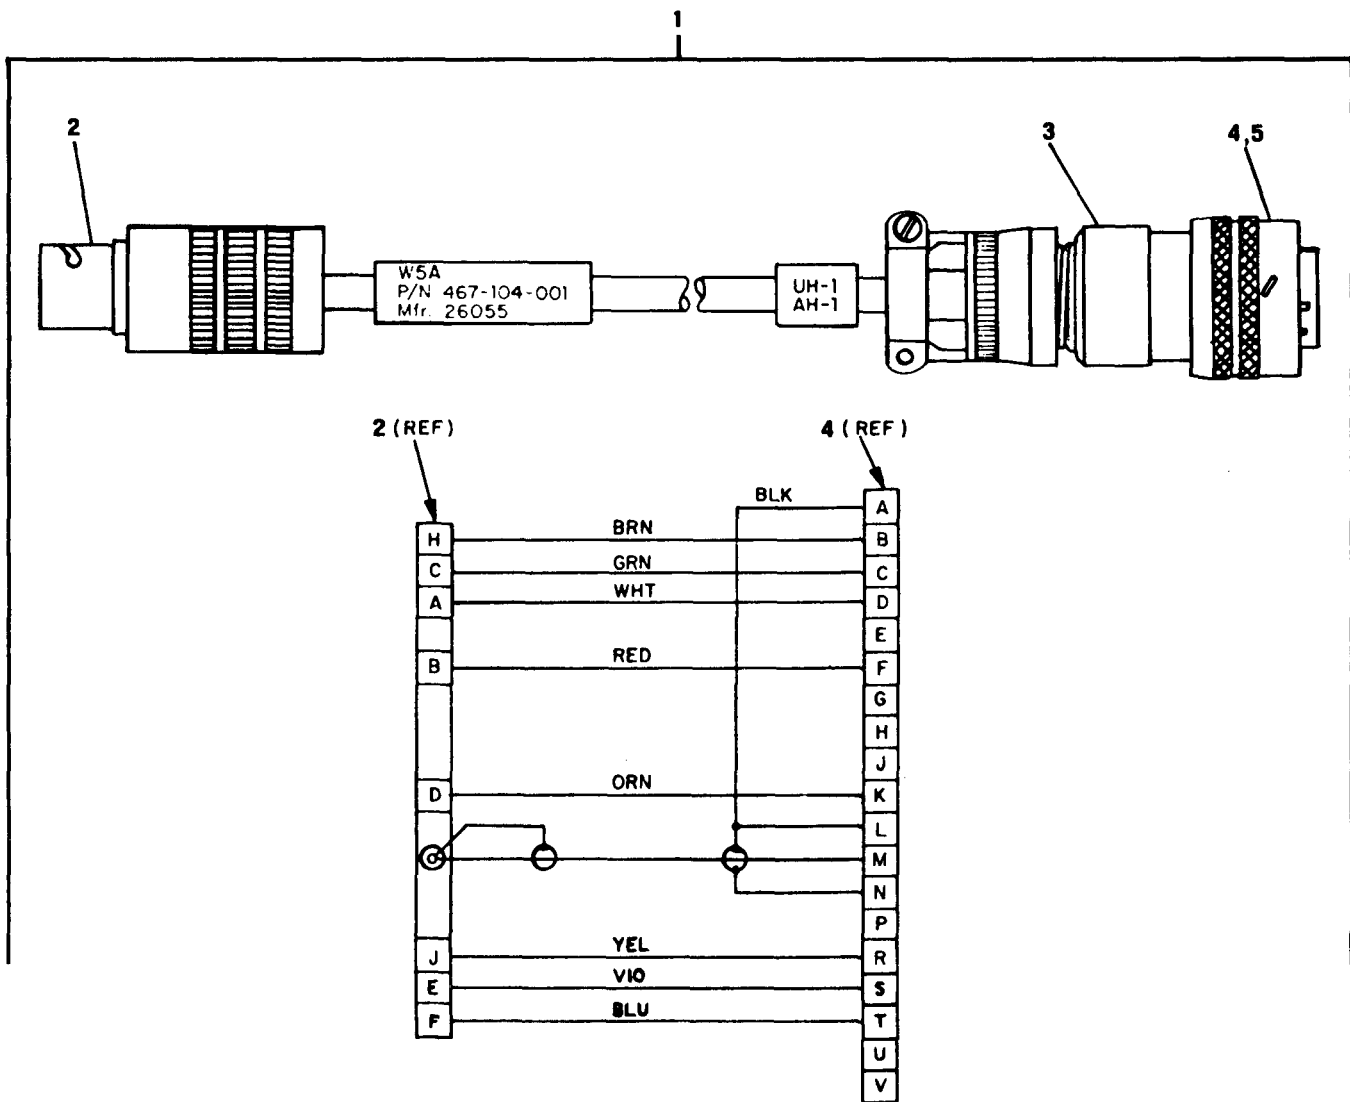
Adapter cable assembly W5A, part number 467-104-001
